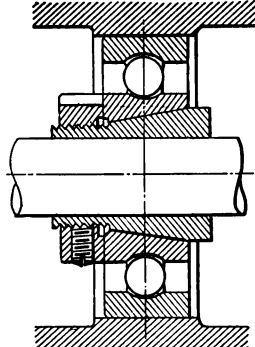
Adapter Bearing for Shafting varying from Standard Size
